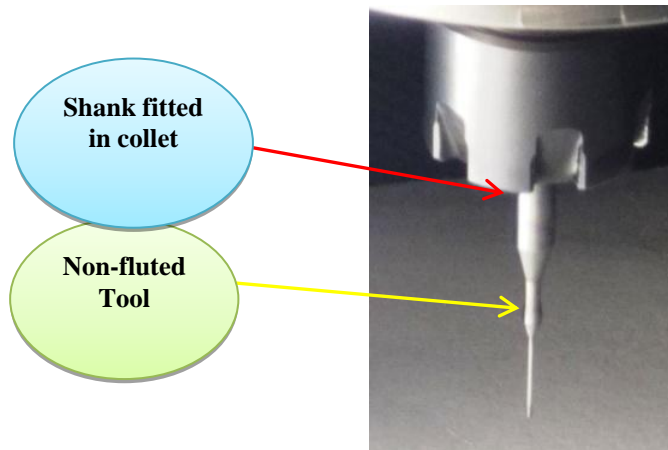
Easy holding of Actual tool in collet (due to large shank diameter)
